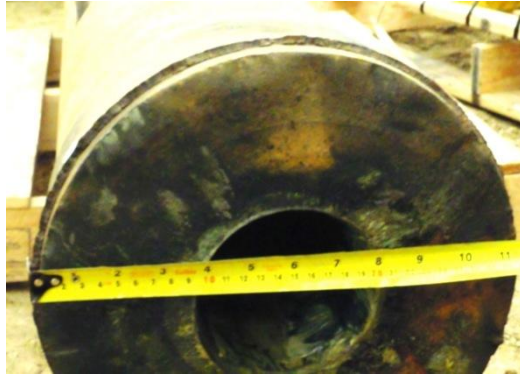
Fatigue fracture of weld connecting repaired and joined inner and outer rotating shafts.
